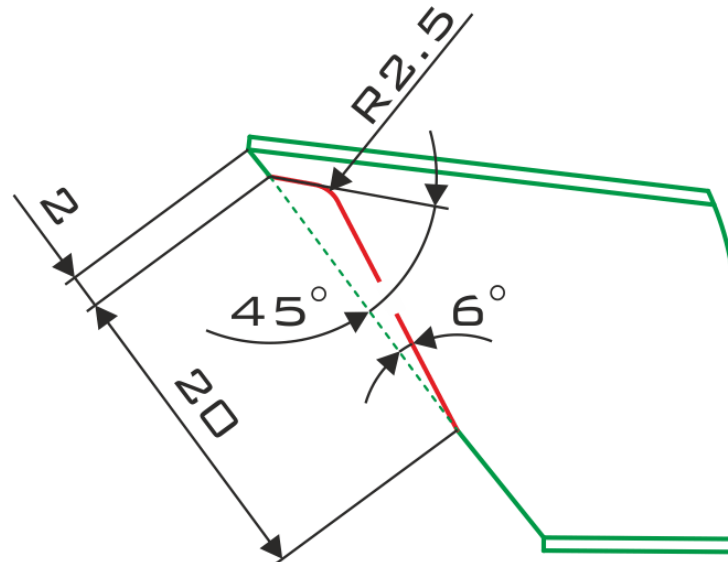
rib cutout geometry (green colour marks the original shape while the red colour the machined shape)
